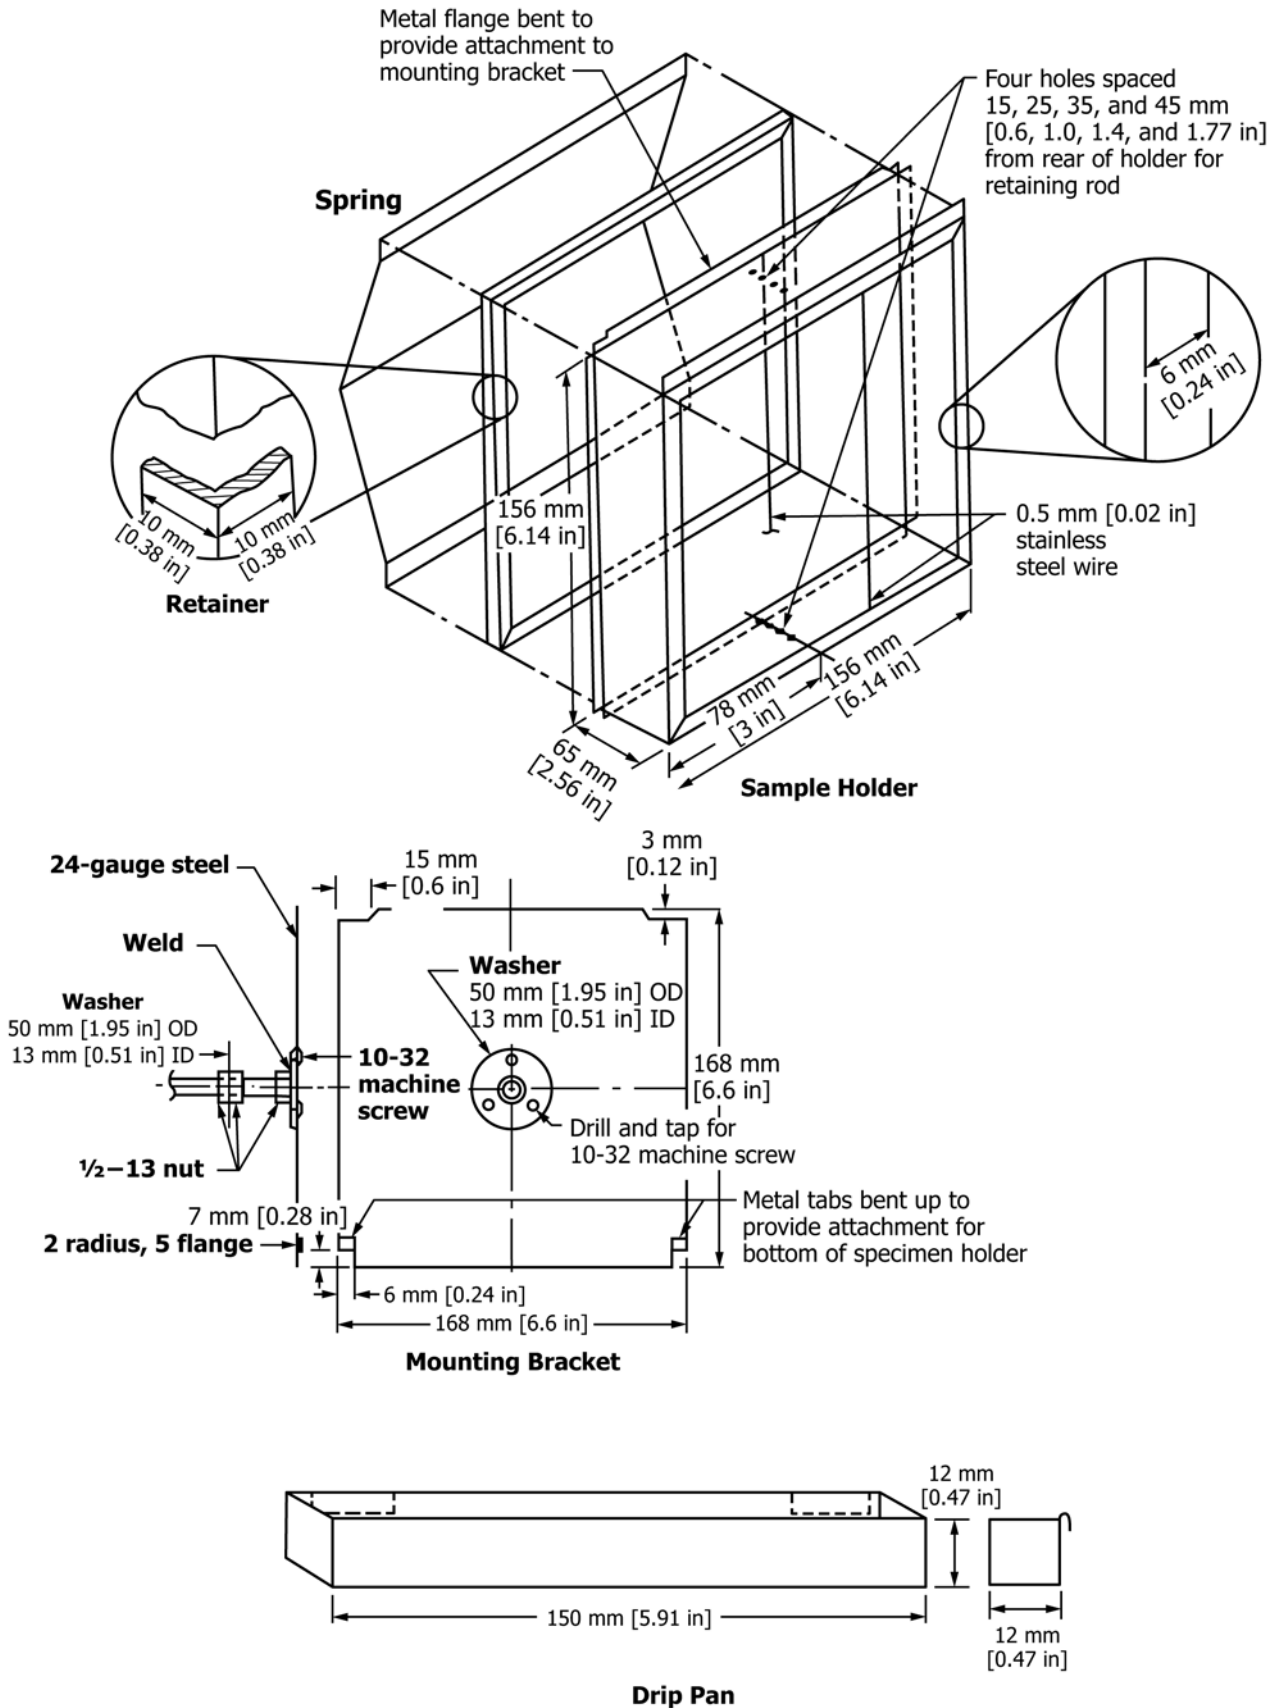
Heat Release Specimen Holder, Mounting Bracket, and Drip Pan
